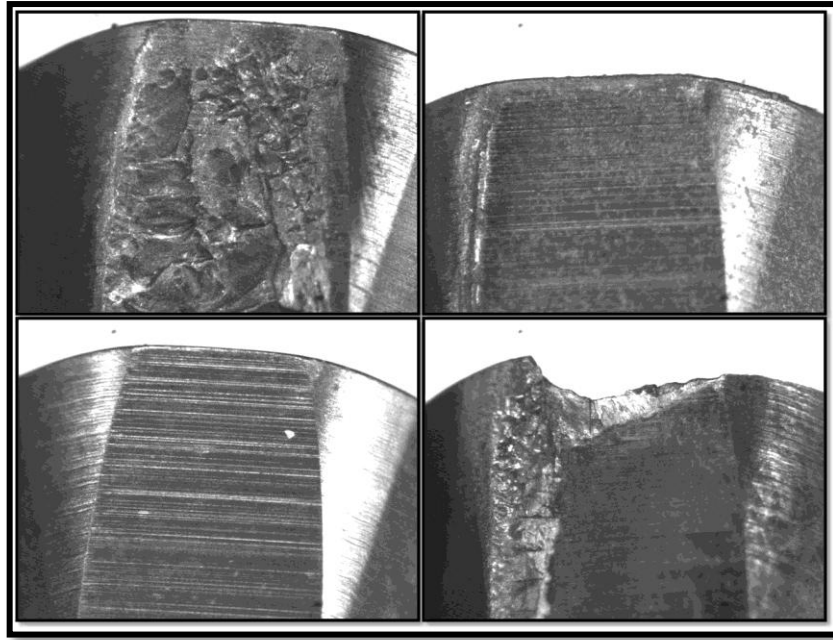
Figure shows flank face of the inserts used for the milling using standard cutting fluid (Magnification 2X)
